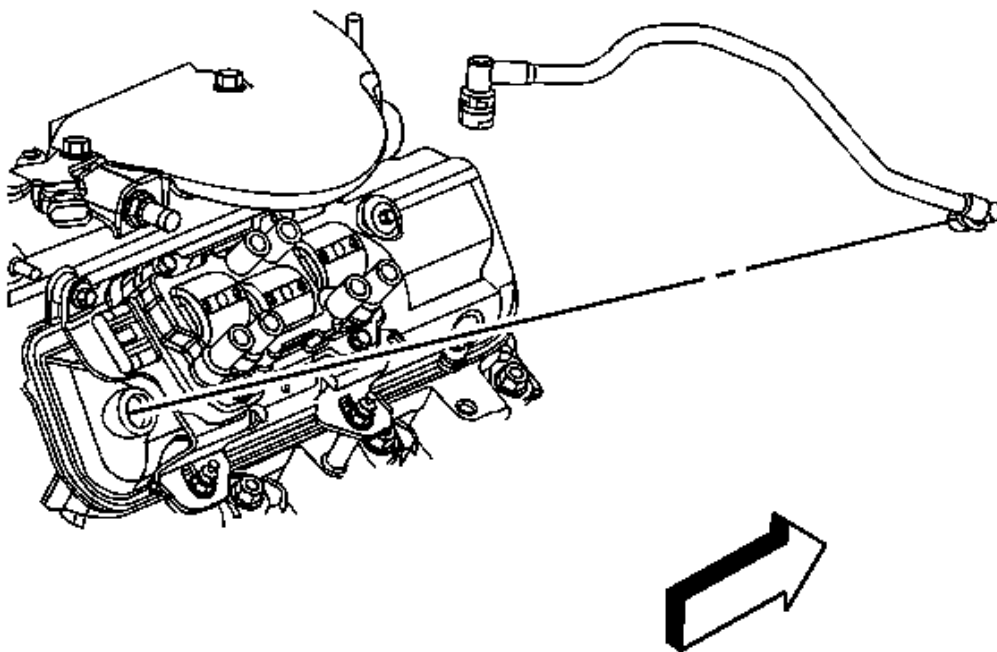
Positive Crankcase Ventilation (PCV) Fresh Air Tube
